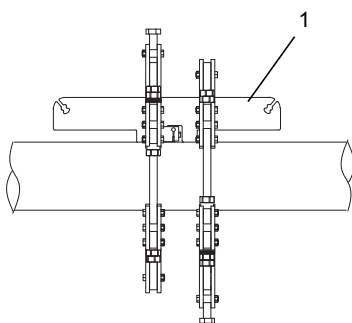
Installed pipe mounting fixtures (diagonal arrangement, side view)
